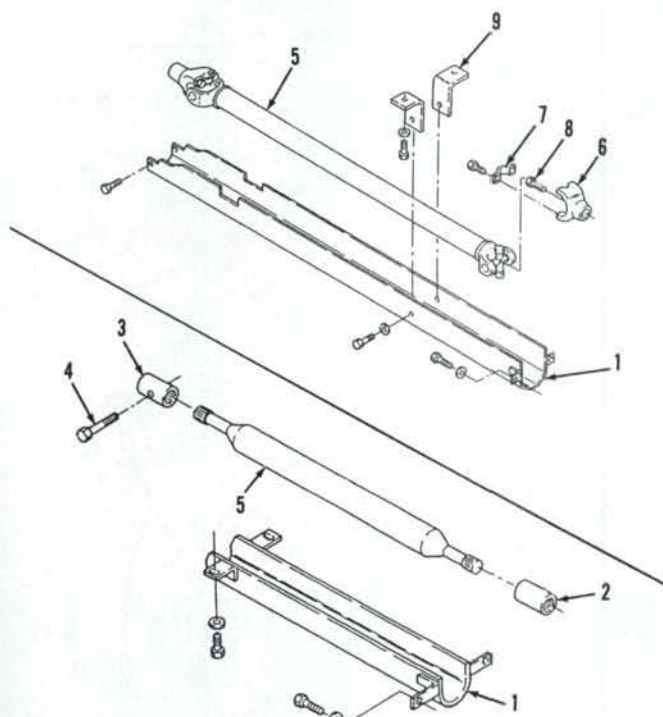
The drive shaft and shield at top are typical of models with 8 × 2 and 16 × 4 transmissions. The drive shaft and shield shown in the lower view are typical of models with transmissions providing 12 × 12 and 16 × 16 speed transmissions.
